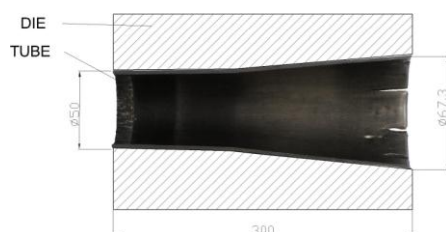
Photograph of the tube expansion test performed by an explosion in a die
